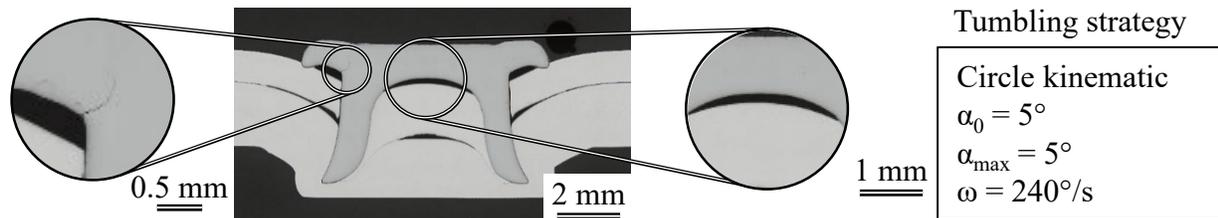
Macrograph with detail views of joint set with adapted tumbling strategy
